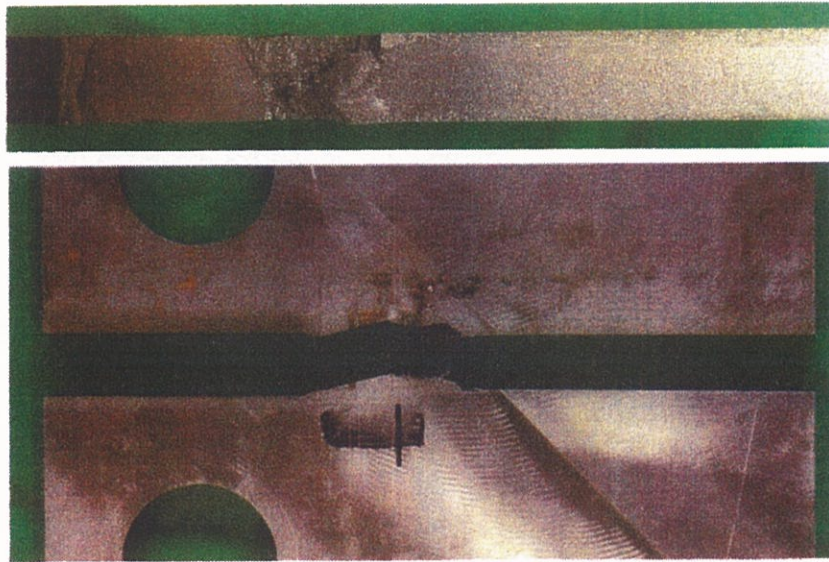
Fracture surface and pass after fracture toughness test (FTI-1, -116°C)
